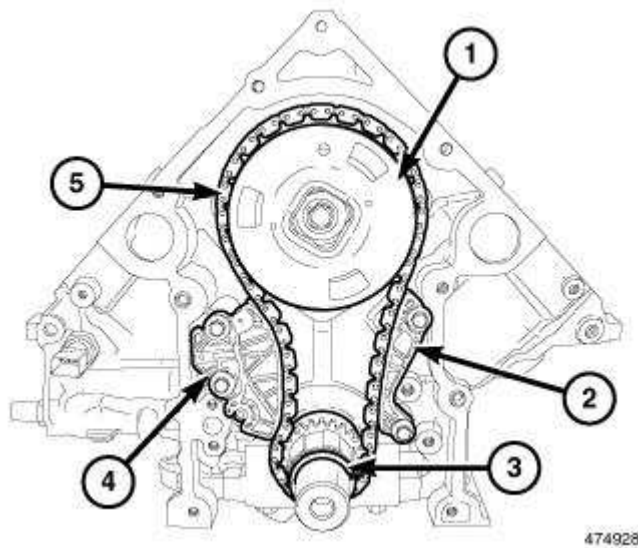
Timing Chain, Sprockets, Timing Chain Tensioner & Guide
